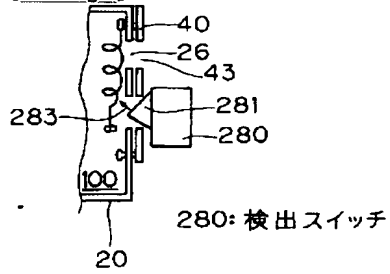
It is the abbreviation sectional view showing the configuration of conventional projector equipment.
